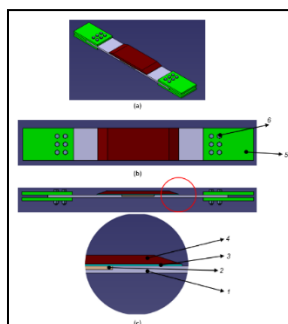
Overview of the test specimen, (a) Isometric, (b) Top view, and (c) Front view, along with details of the patch area.
